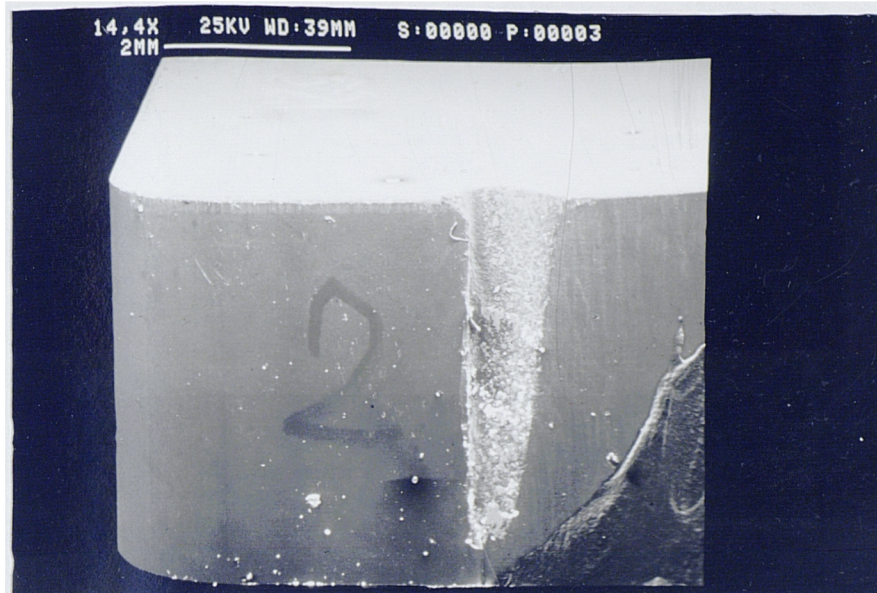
Severe DOC notch on the flank face of CC620 tool used in the dry machining of Waspaloy (V=150m/min, F=0.125mm/rev, DOC=2.5mm)
